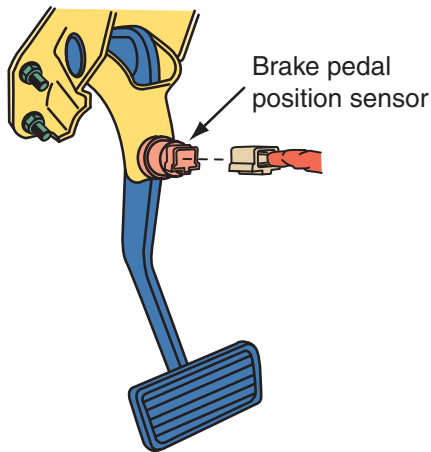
A brake pedal position sensor located at the brake pedal assembly.
